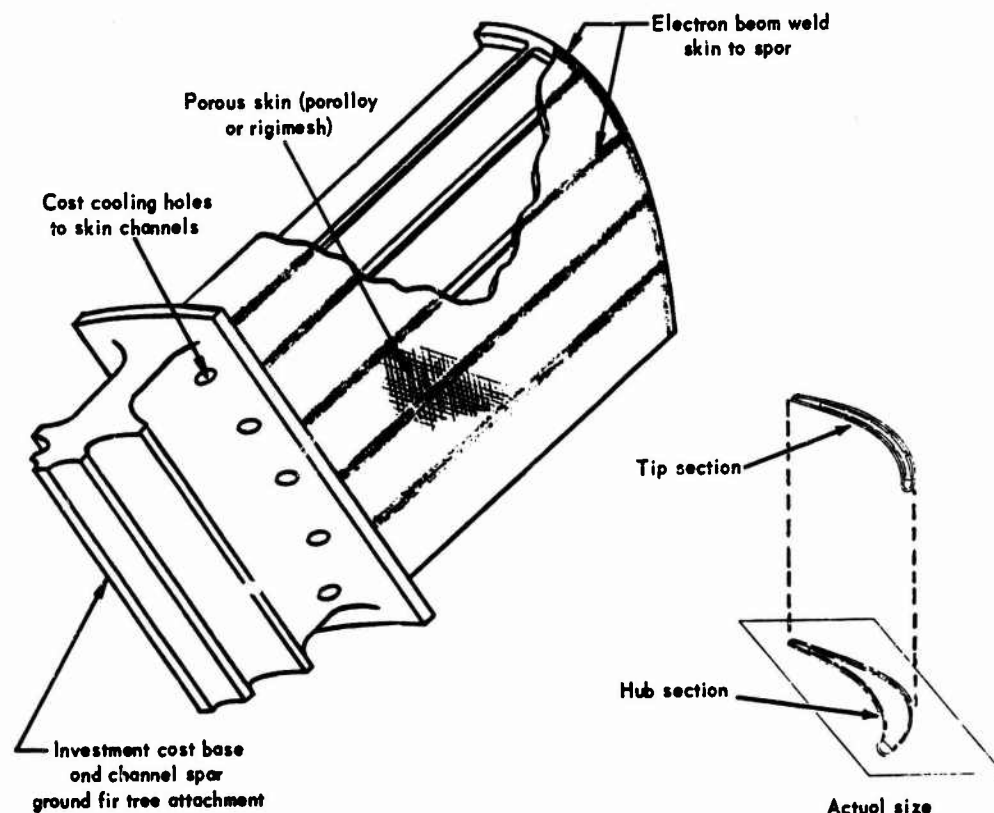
Strut-Supported Transpiration-Cooled Turbine Blade
